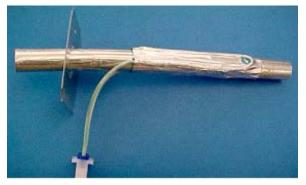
Assemble grounding plate to tube end with heater electrical connector.
